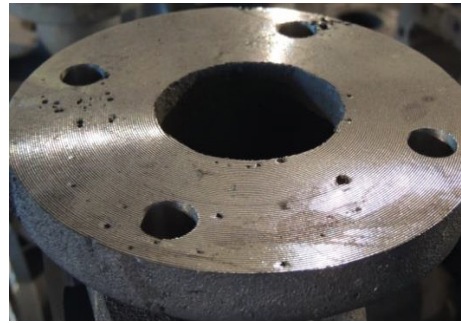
shows a gray iron valve in which a defect due to trapped gas during solidification in the mold can be observed.
